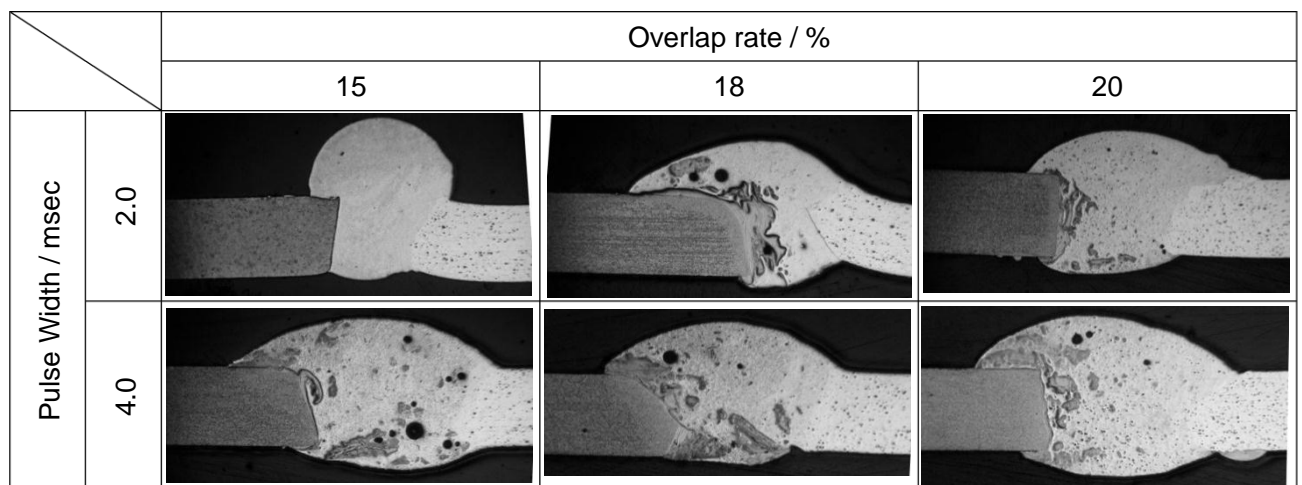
Welding conditions indicating bead appearance of welded joints.
